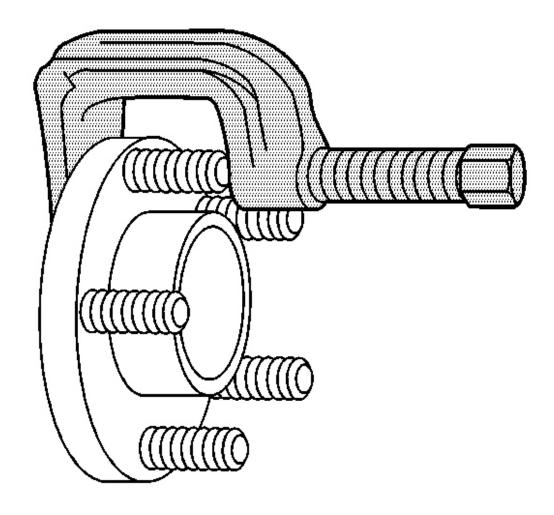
Removing Wheel Stud From Axle Flange Courtesy of GENERAL MOTORS CORP.
